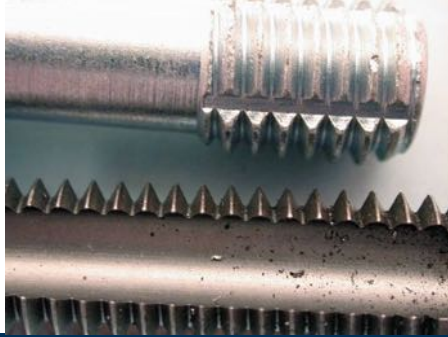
Deburring all sharp edges is an important step to achieve proper engine assembly.
